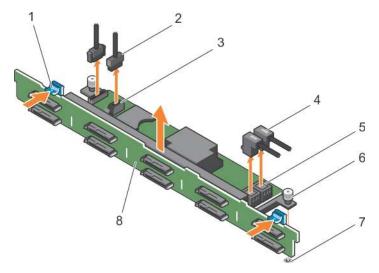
Removing the 2.5-inch (x10) hard drive backplane
